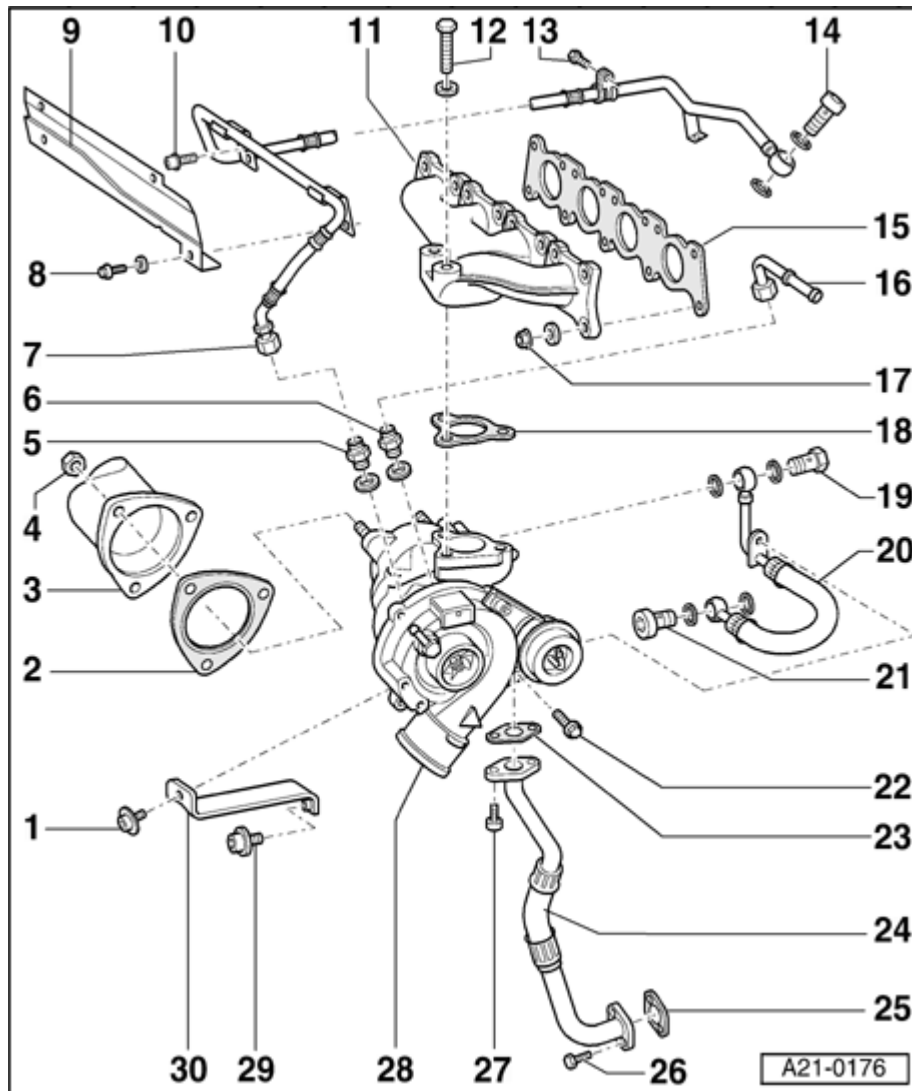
Turbocharger, Removing And Installing - Overview (Part I)
